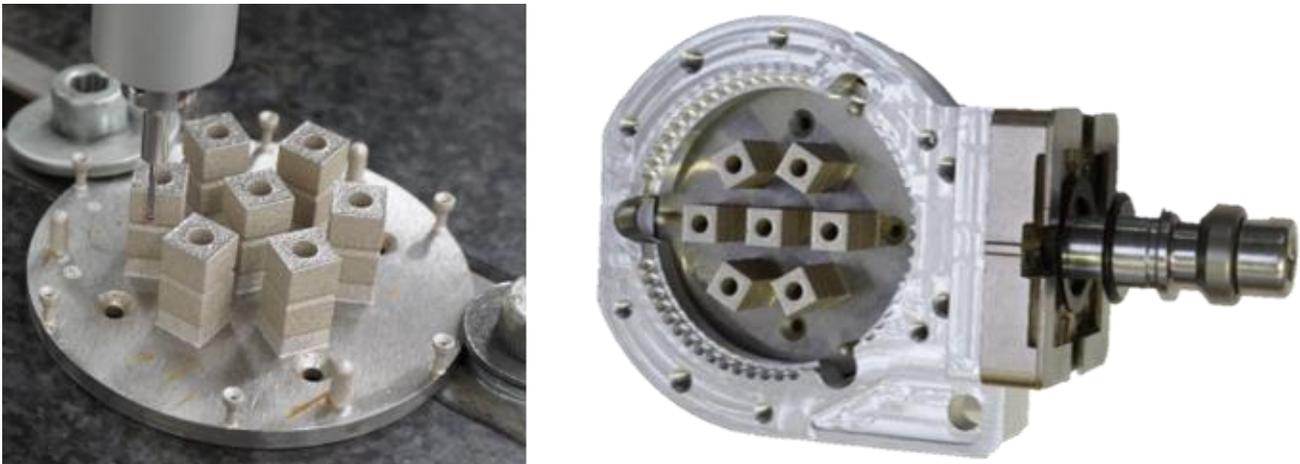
Left: measurement on a coordinate measuring machine; right: part on building platform inserted in CD
